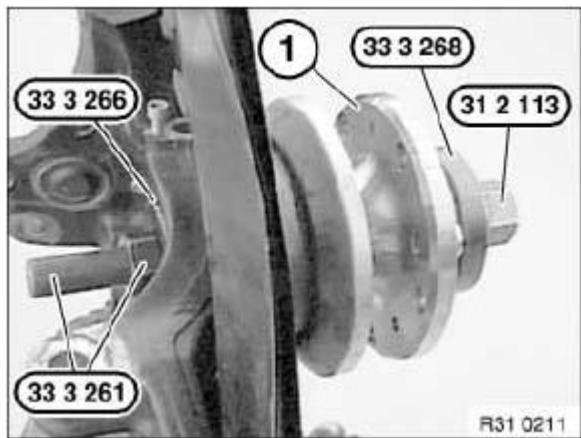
Identifying Special Tool (31 2 113), (33 3 268) And (33 3 266)
